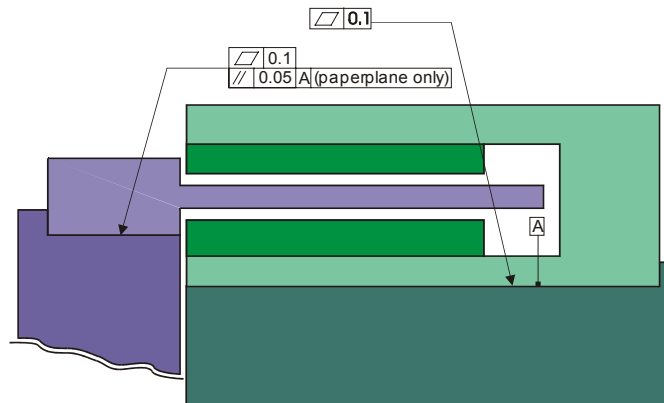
Flatness and parallelism of mounting surfaces, schematically
